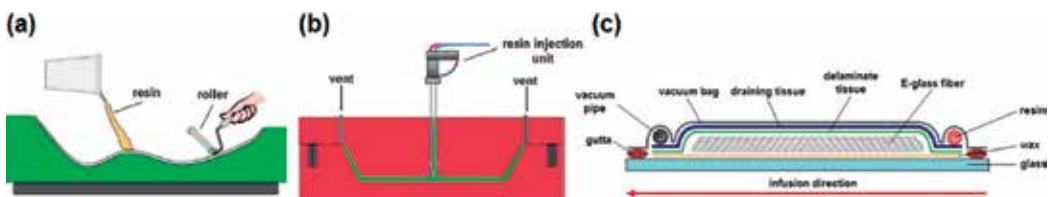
Schematic views of some of the composite fabrication techniques. (a) Hand layup; (b) resin transfer molding [63]; and (c) vacuum-assisted resin transfer molding [20].
